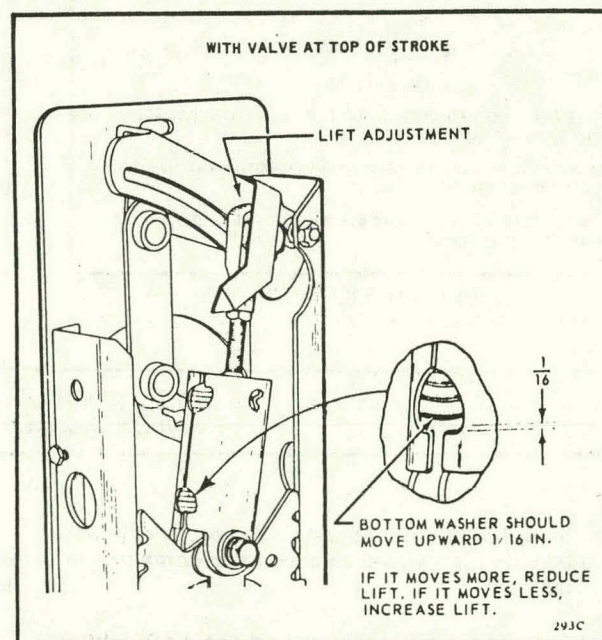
THREE-WAY VALVE ADJUSTMENT.
